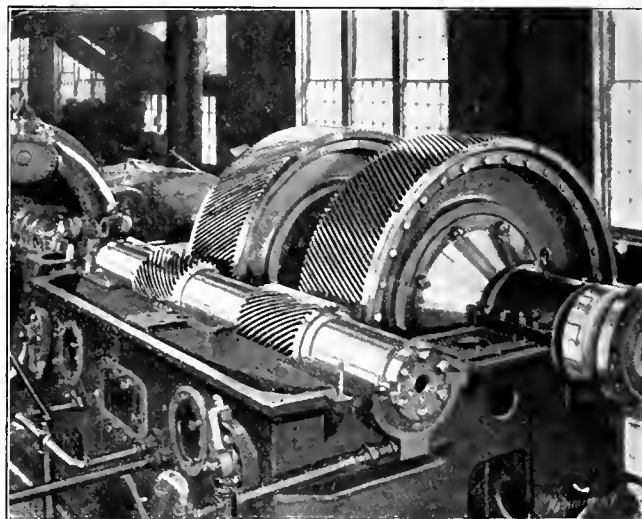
The Gearing with the Cover and the Top Half of the Floating Frame Removed
